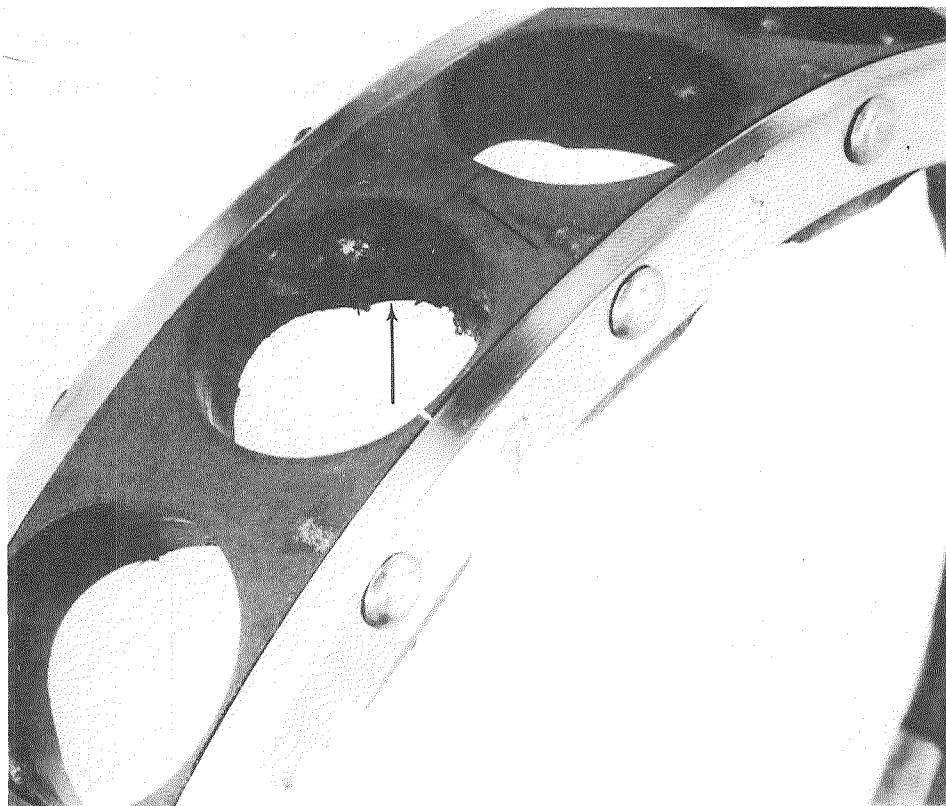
Cage L2 Pocket Wear and Fracture, Ball No. 7, Test No. 16A and 16B
